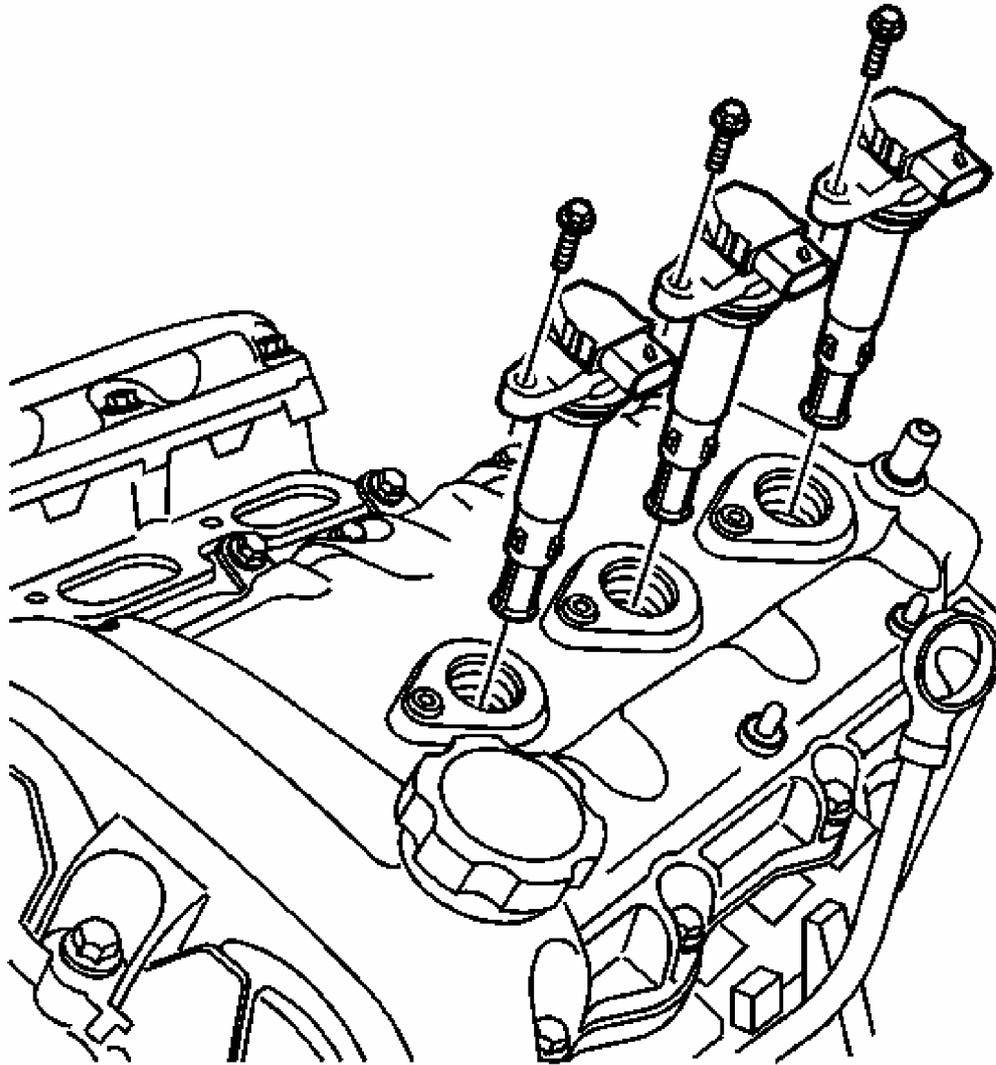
Identifying Left Cylinder Head Ignition Coils
